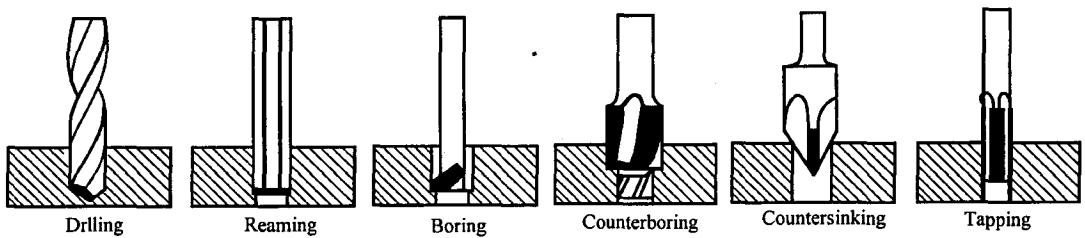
1 - 2 The six common operation that can be done on drilling machine
